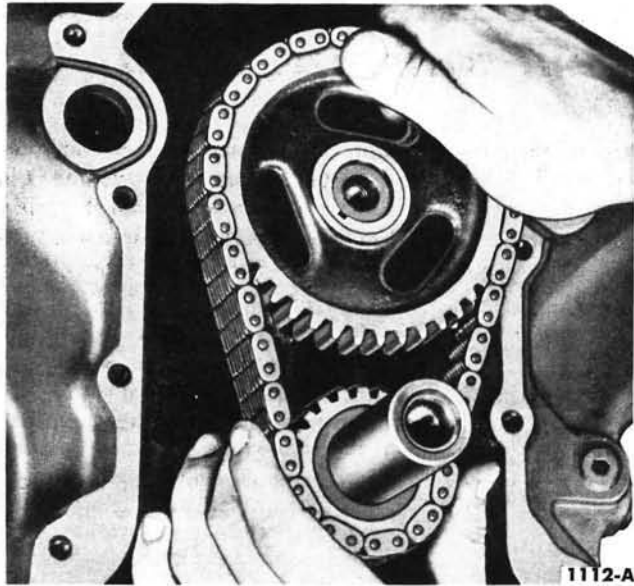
Timing Chain and Sprockets Removal or Installation—292 Engine
